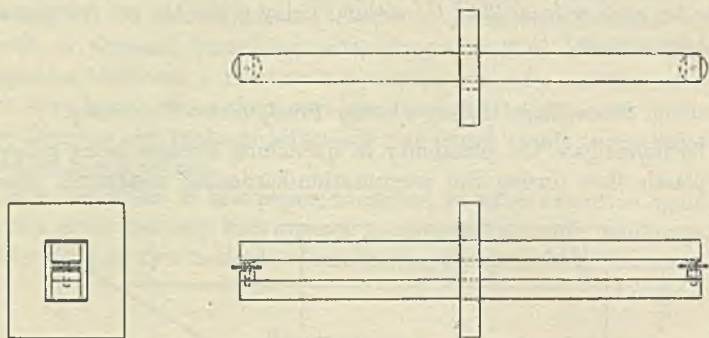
Screw-Type Wedge Assembly for Stress Relief Tests.
